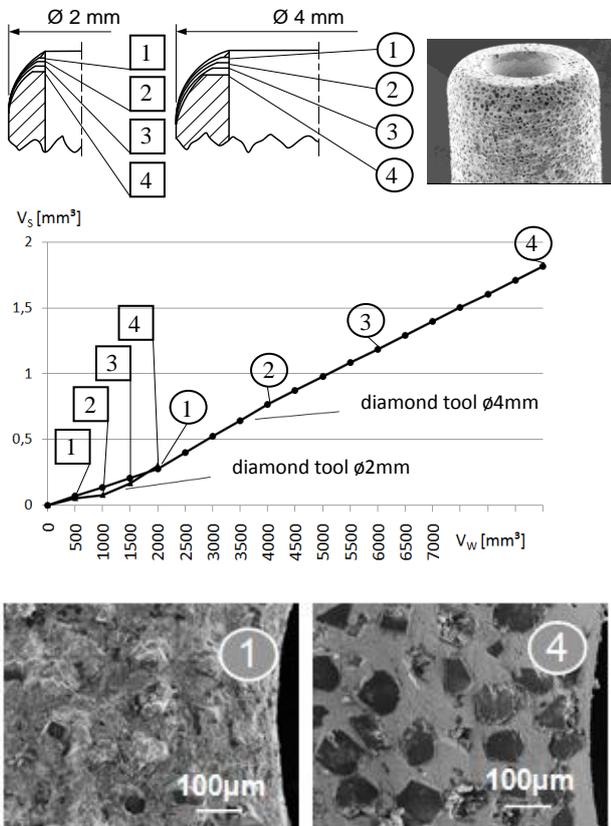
SiSiC-cutting tests with diamond tools and ultrasonic vibration
